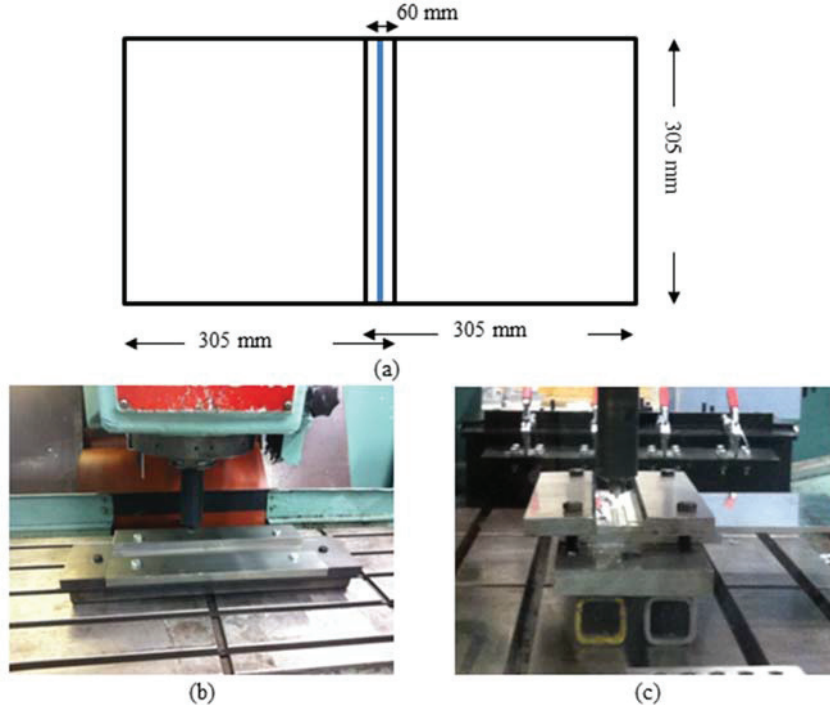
The dimensions of the FSW lap joint samples are shown in (a). (b) and (c) shows photos of the setup used in the manufacturing of the samples.
